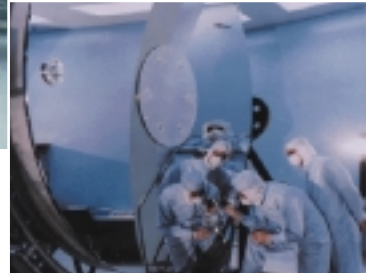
B Technicians inspect the 2.4 m main mirror before assembly.
